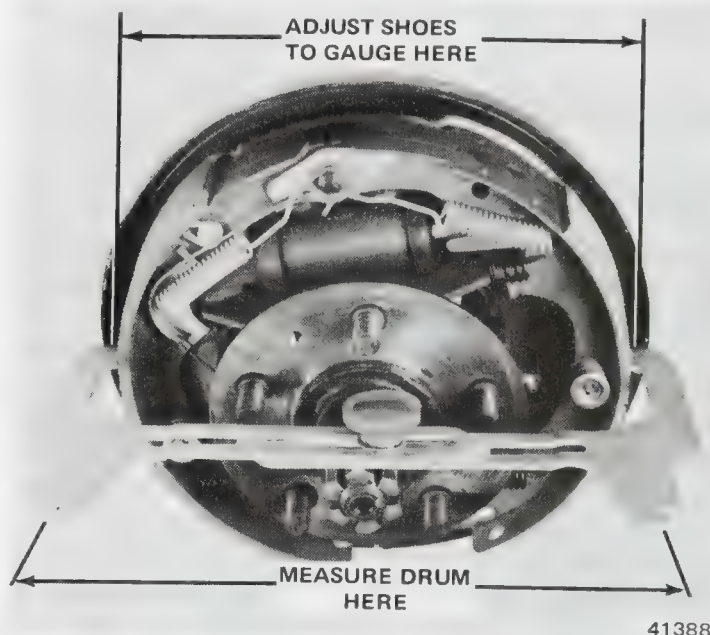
F-6 Brakeshoe-to-Drum Clearance Gauge Usage
